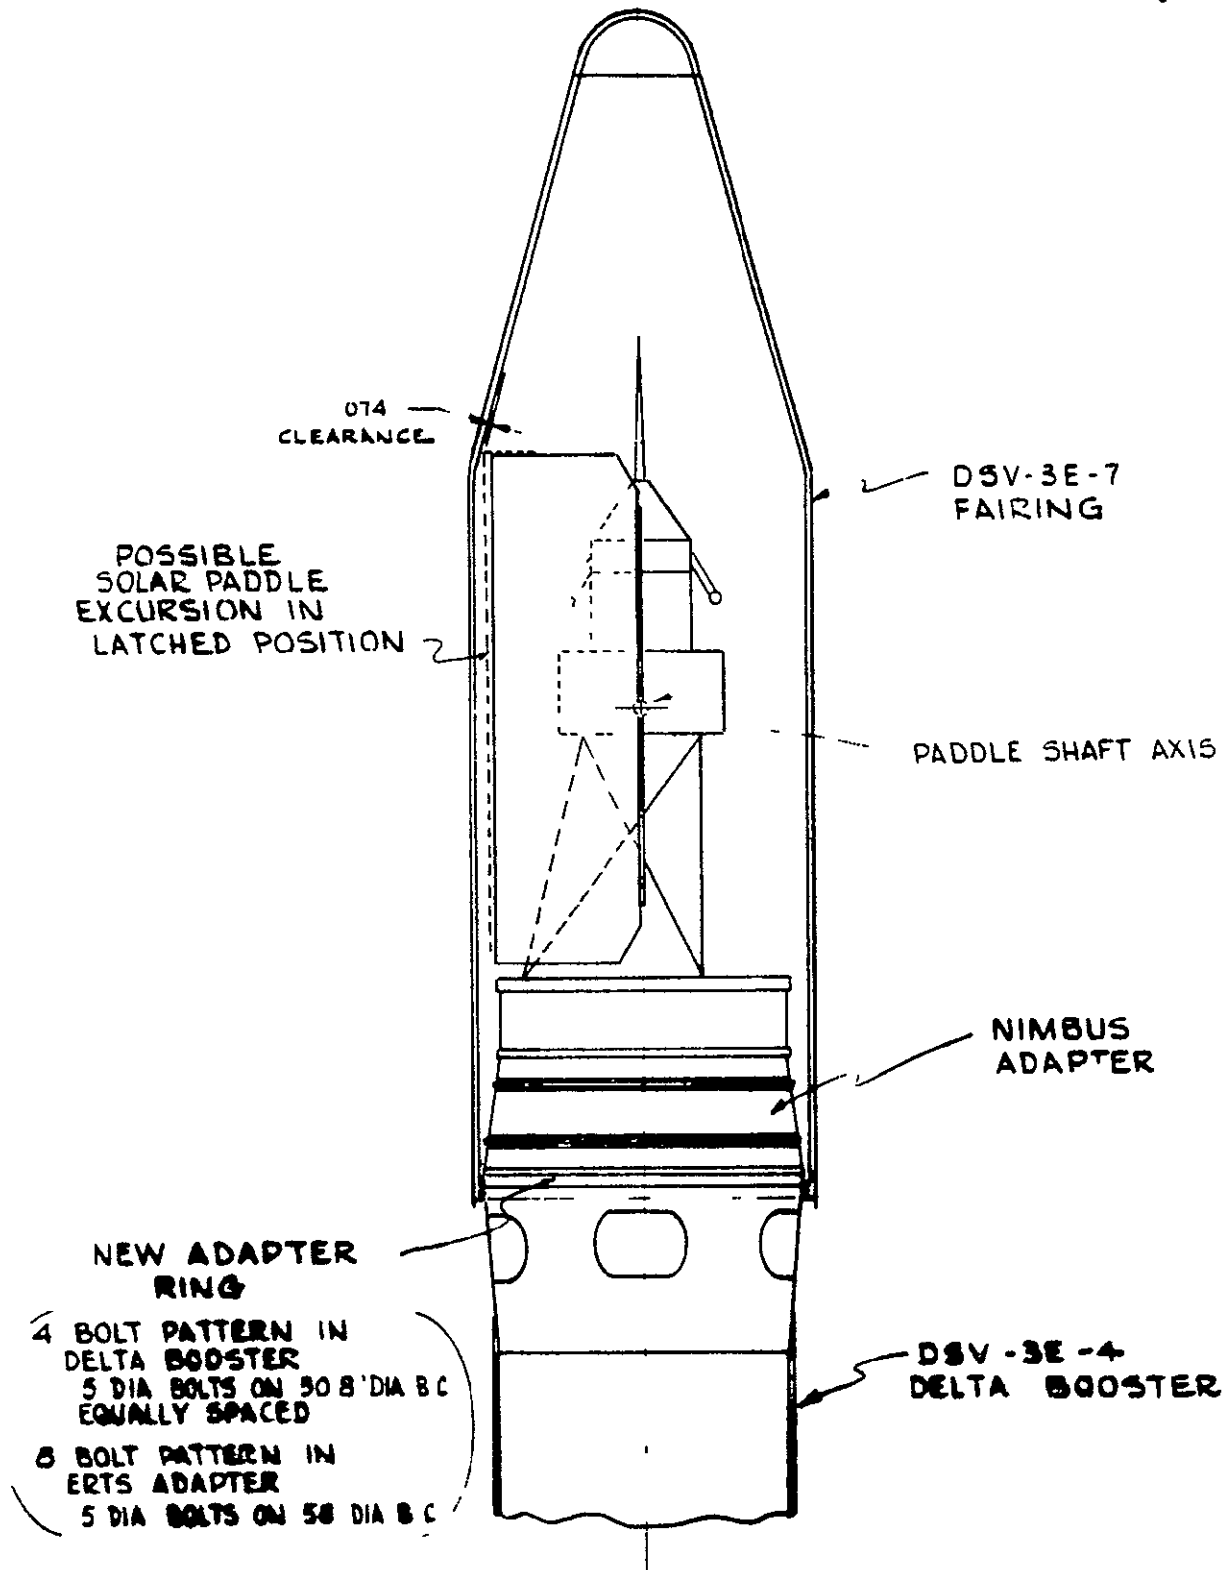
Paddle Assembly Protrudes into Conical Portion of Shroud
